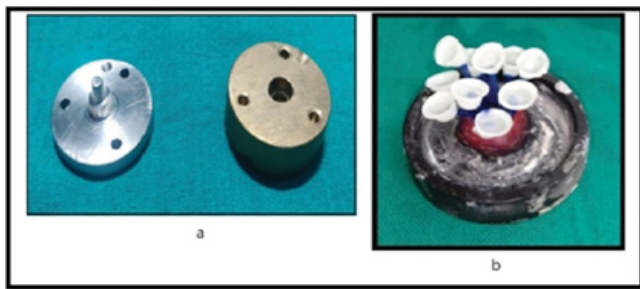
(a) Stainless Steel Metal Die and Mould; (b) Wax Pattern.
